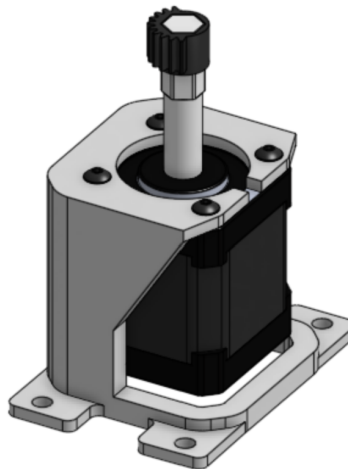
Gear and shaft adapter slid onto the auger motor shaft.
